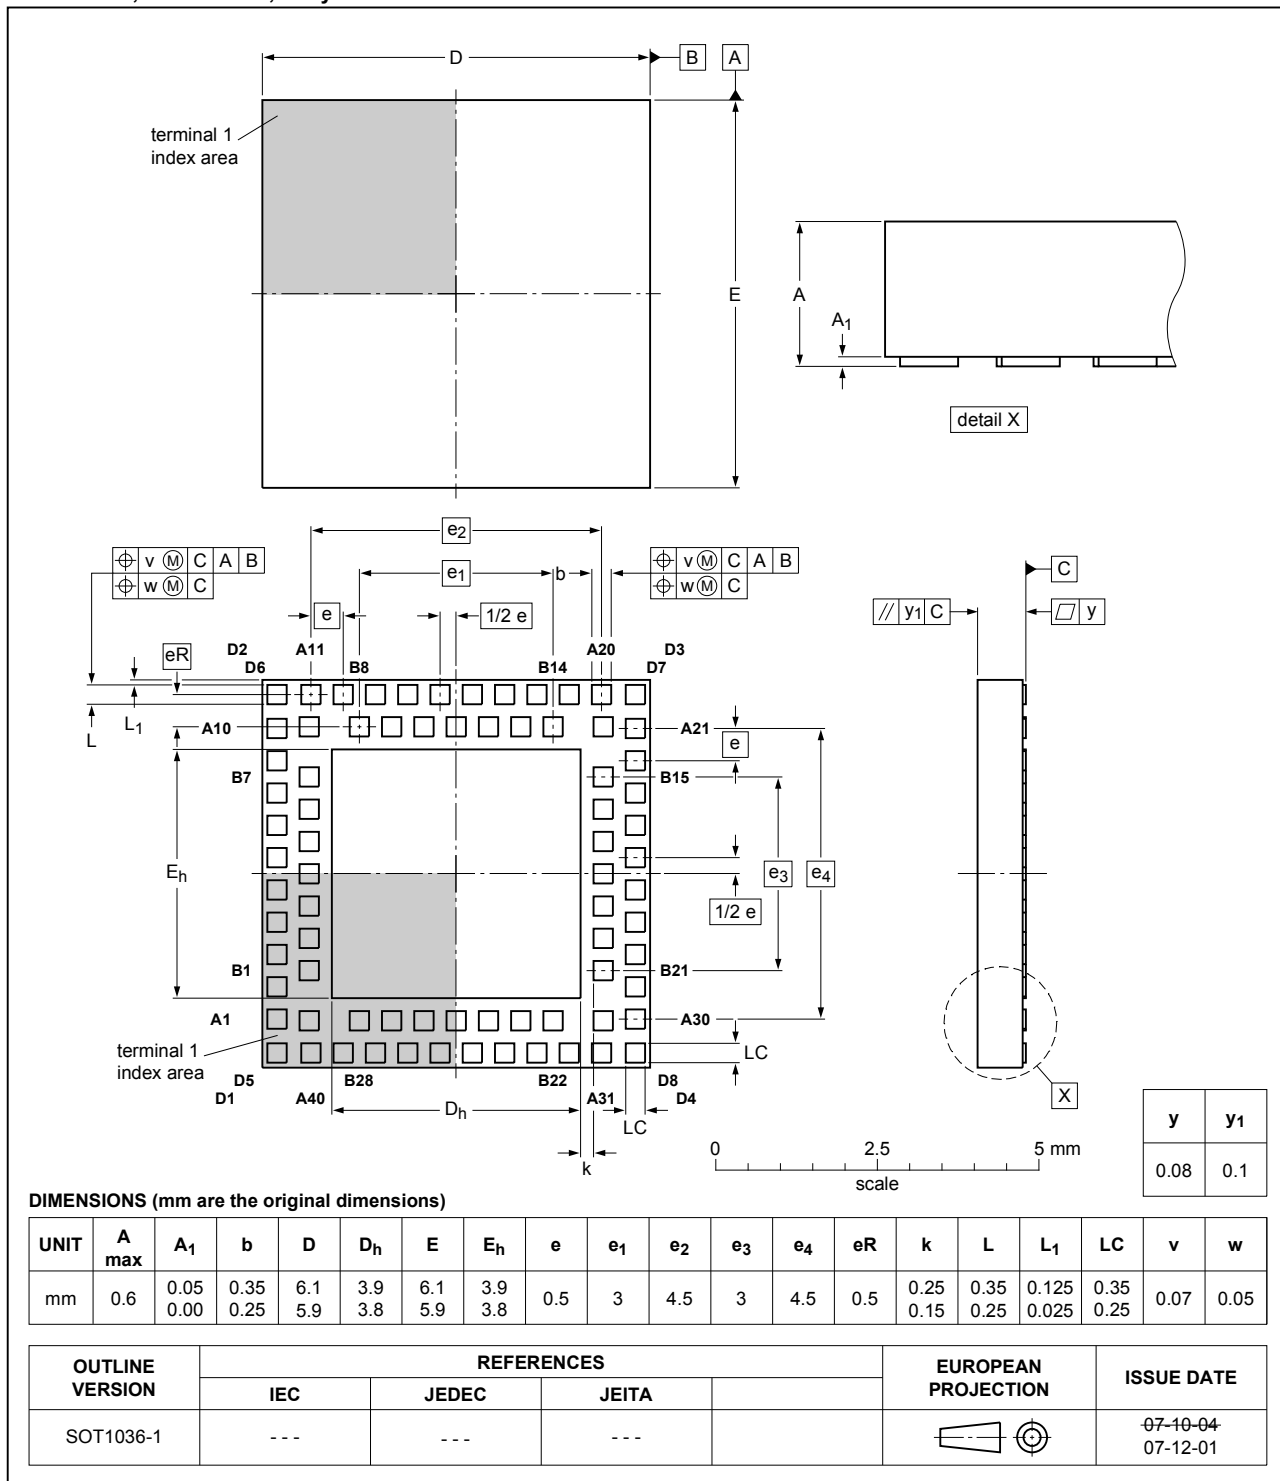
Package outline HUQFN76U (SOT1036-1)
